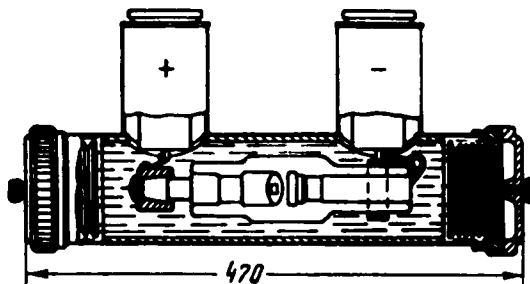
Diagnostic tube, type BDM-100, in shielded casing with oil insulation.
